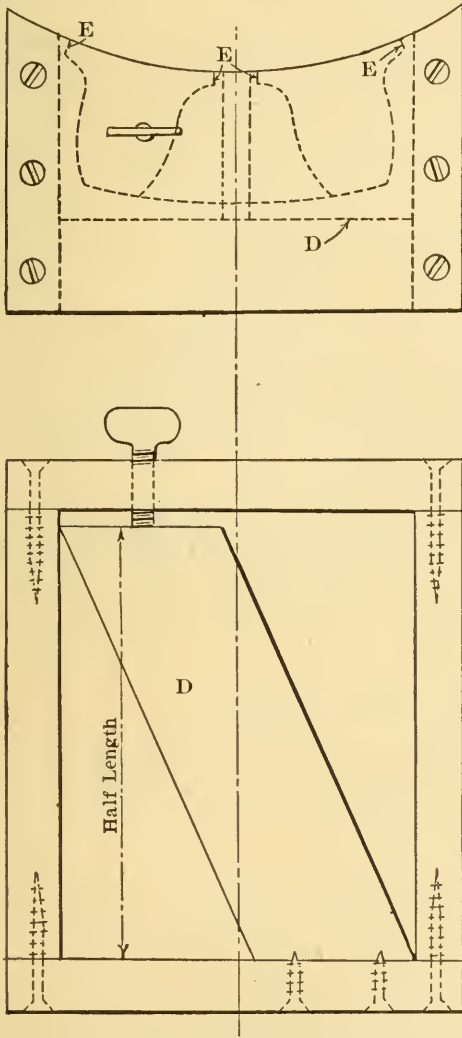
JIG FOR SAWING SEAL ON CROWN.
